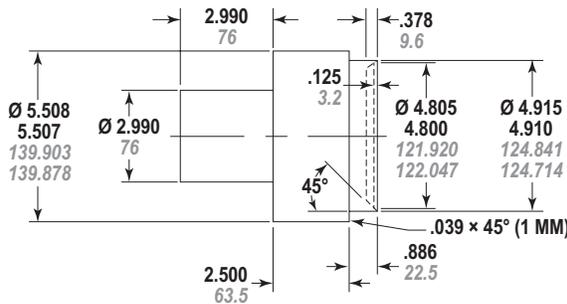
ALIGNMENT TOOL FOR DRIVE SHAFT BEARING
